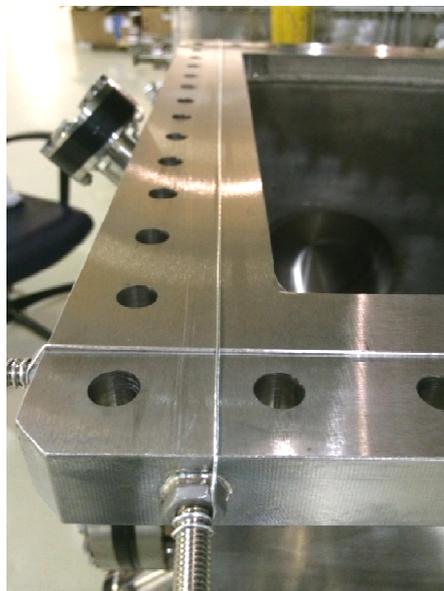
Sealing surface with 99.99% Purely aluminum wire
